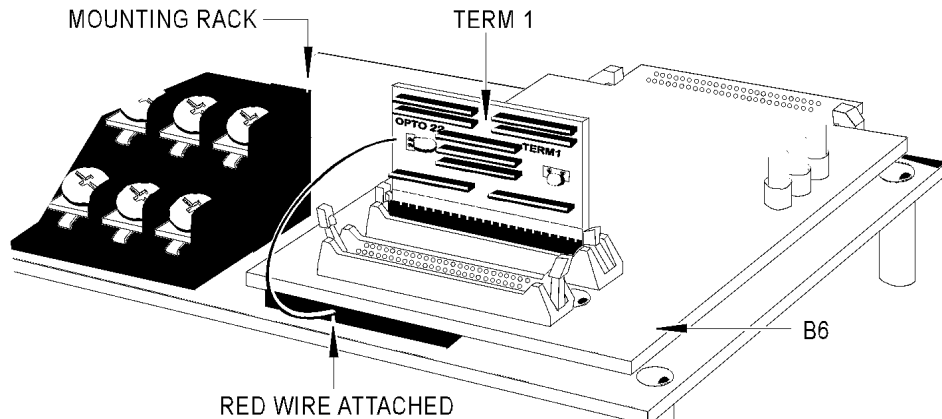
Terminator Board Installed on a B6-Compatible Mounting Rack
